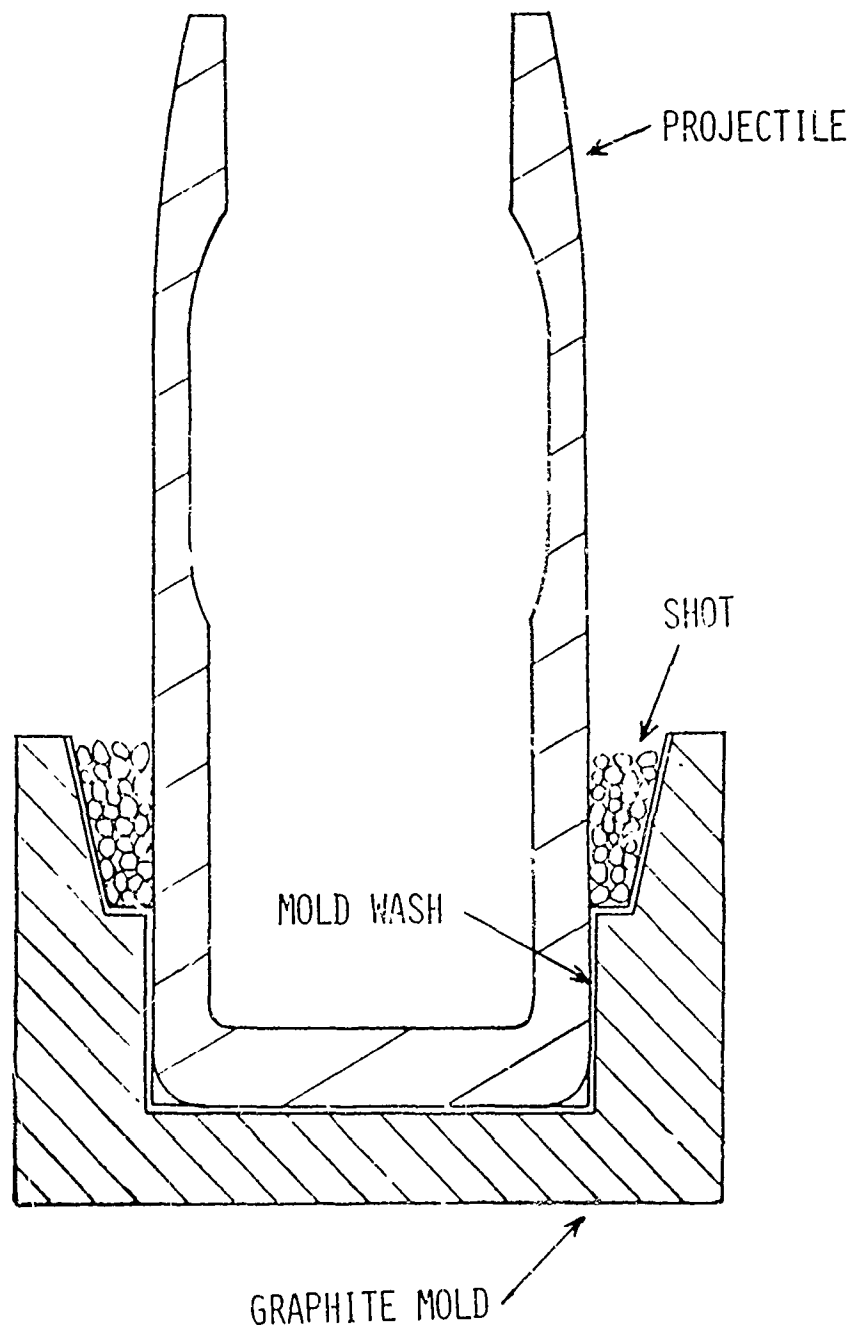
Schematic Showing Projectile Body, Mold and Shot Assembly Preparatory to Banding Operation
